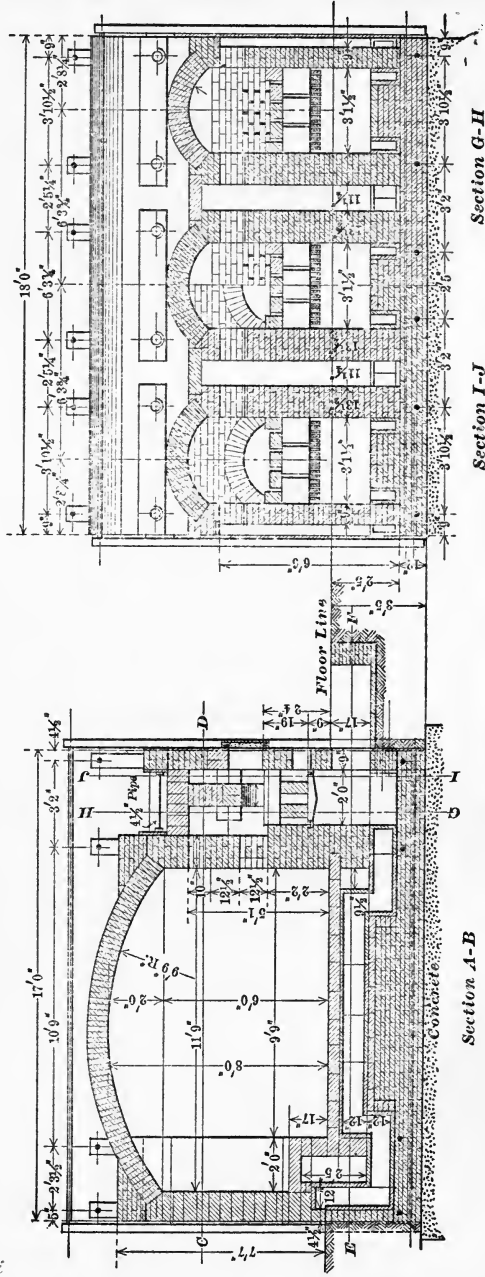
Sectional views of annealing furnace shown in Fig. 31
